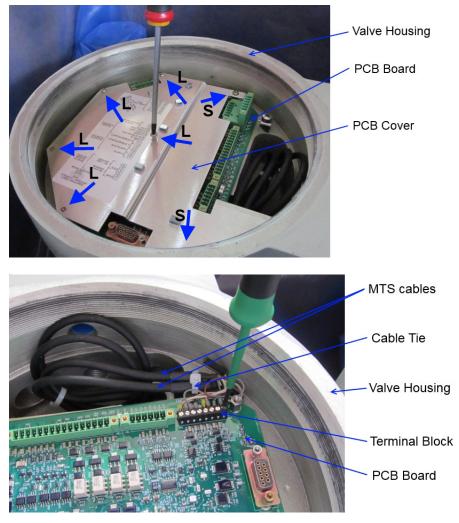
Remote Servo Only, PCBA Cover Removal
